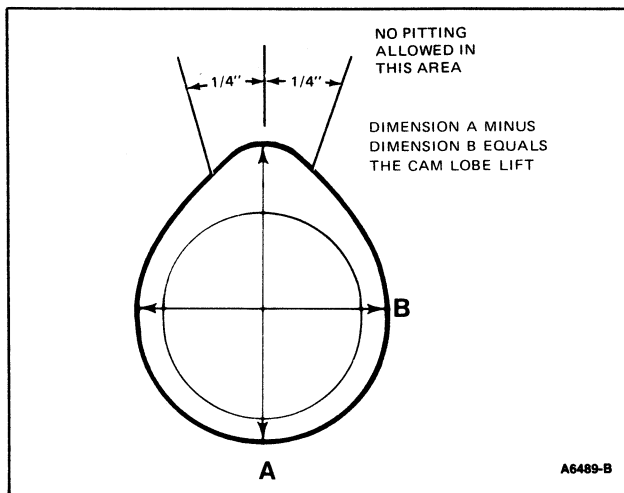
Camshaft Lobe Lift Measurement — Camshaft Removed
